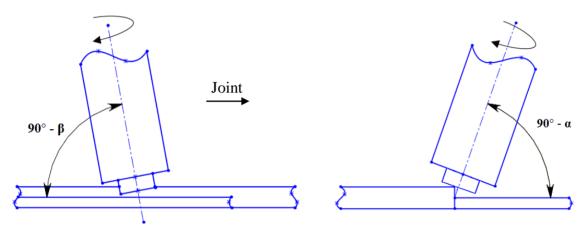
Plan for carrying out the welds.  $\beta$  - tilt angle (TA) equal to 2°,  $\alpha$  - dissimilar thick angle (DTA) from 4° to 6°.
